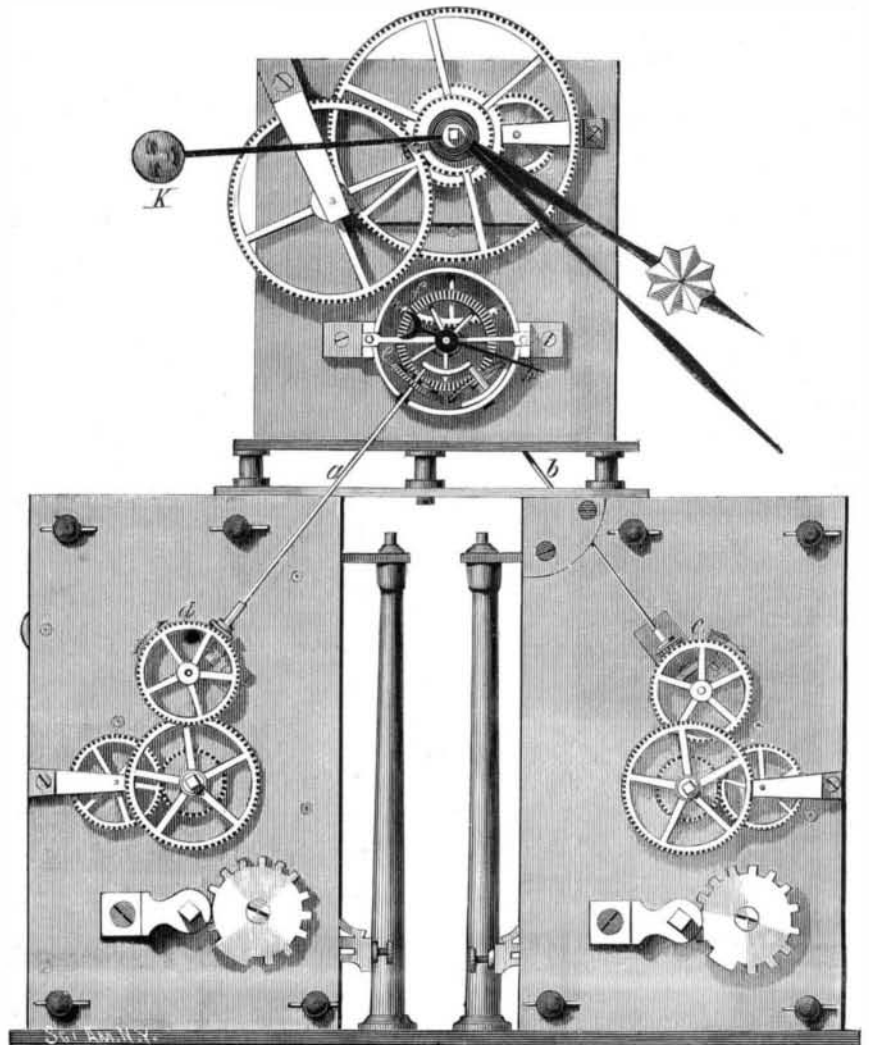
VIEW OF WORKS WITH DIALS REMOVED.
